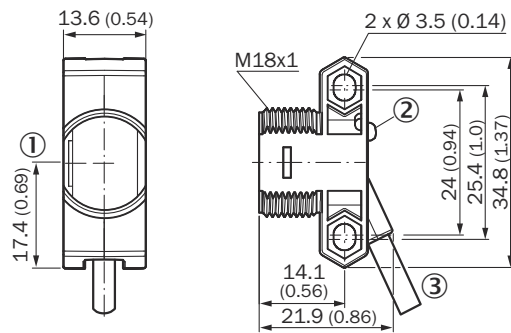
ZSE18-2xxxxx / ZSE18-Bxxxxx, cable
